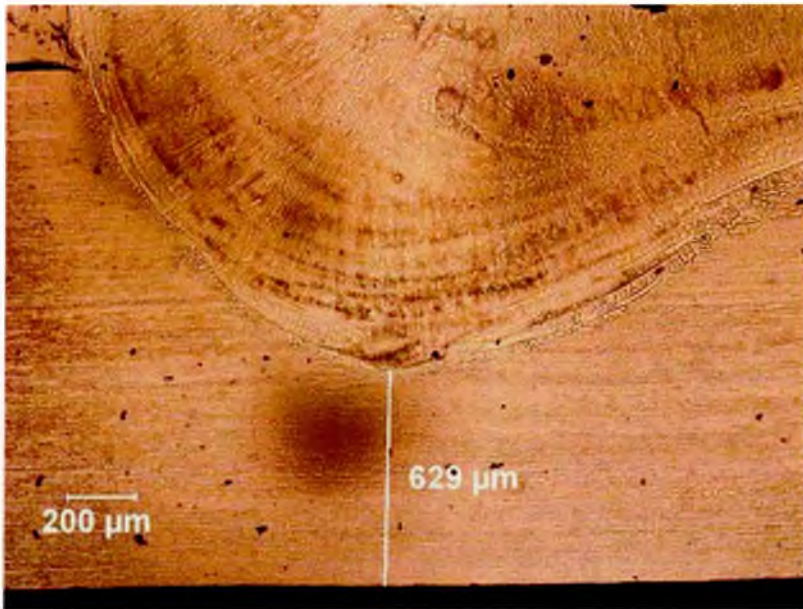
Depth of penetration for laser hybrid welded lap joint for LDX 2101 to zinc coated mild steel.
